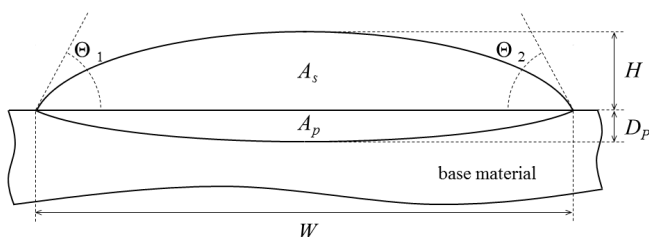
Schematic of the weld seam geometry and the relevant measurands.
